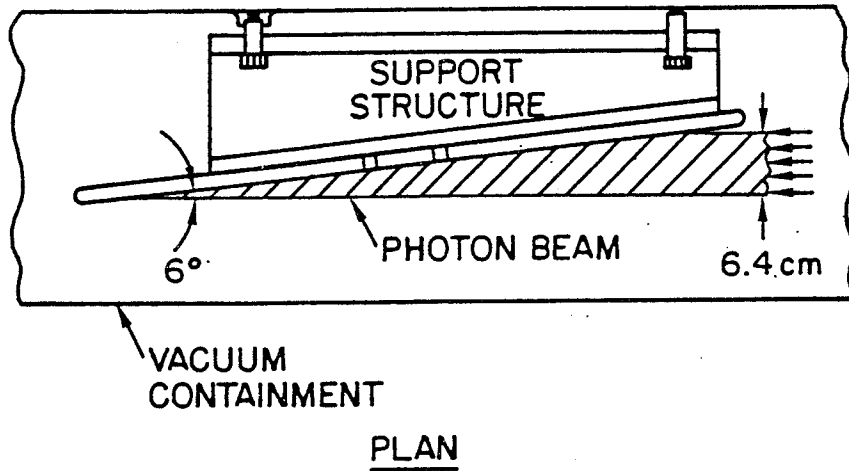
Partial layout of a fixed vertical and fixed horizontal mask assembly.
